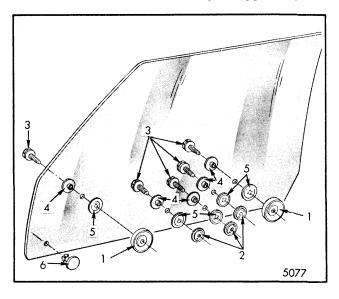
Front Door Window Assembly - "B, C and E" Two-Door Hardtop and Convertible Styles
